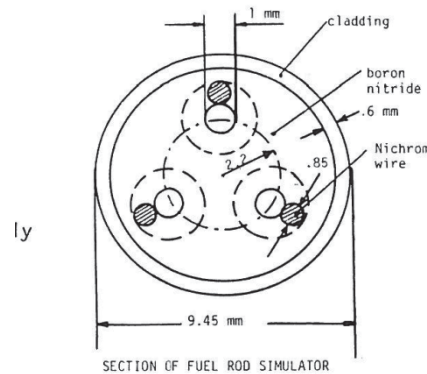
Horizontal section of one assembly (dimensions indicated in mm)
